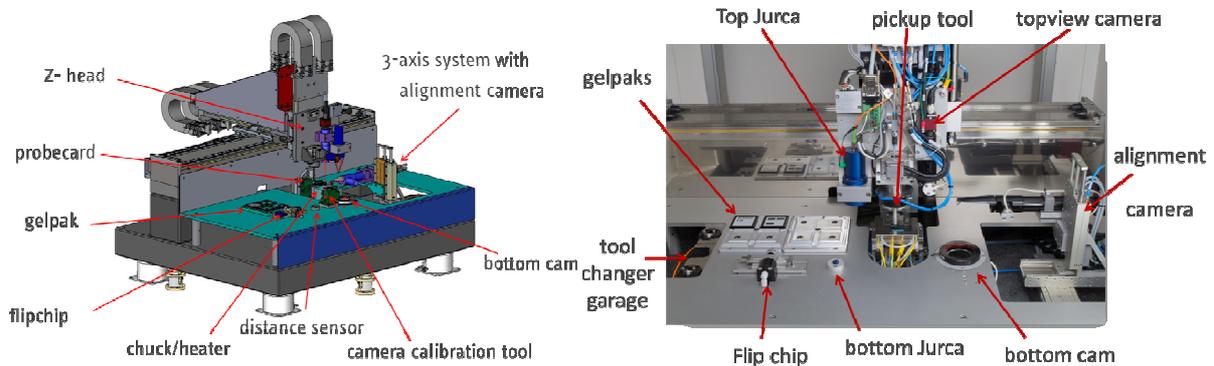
(Left) Assembly machine. 3D-model of the alignment module with flip-chip station, oven with probing mechanism, alignment camera and force controlled bond-head including an optical distance sensor (Right) Photograph of the interior of the assembly machine
